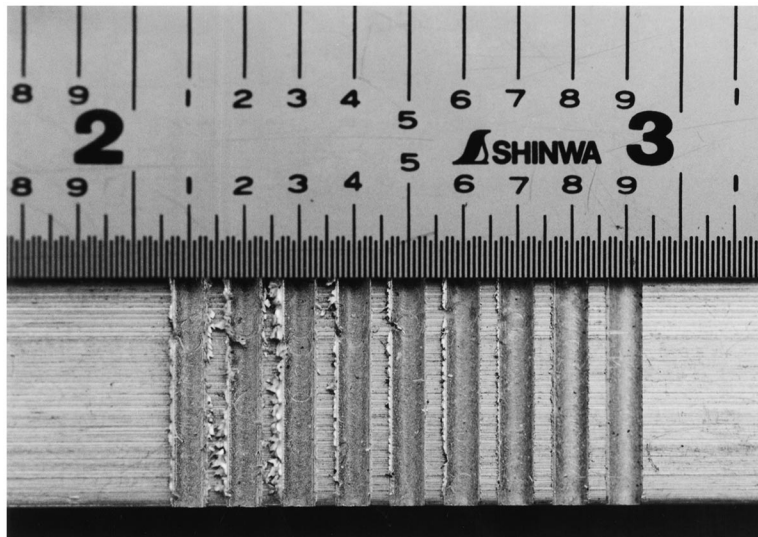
The burr-free and burr slots of an aluminum workpiece machined by a carbide end-mill from new to worn stages (the scale of the ruler is in inches).
